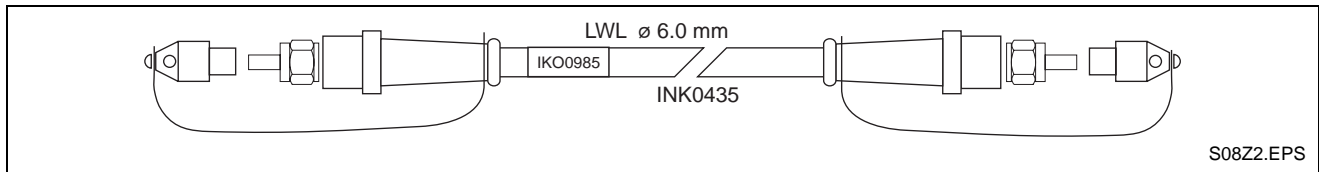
Ready-to-attach LWLs \varnothing 6.0 mm
